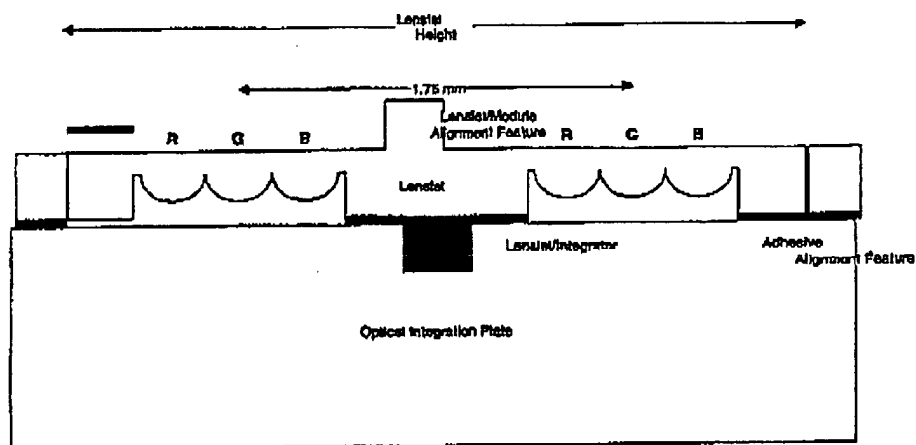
Cross-section view of LED array, lenslet plate and Optical faceplate.
